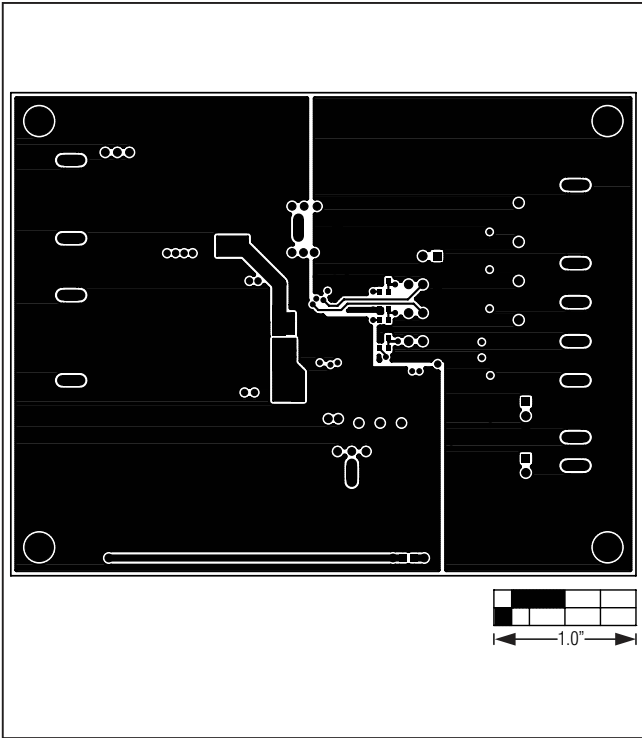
MAX16920B EV Kit PCB Layout—Solder Side
